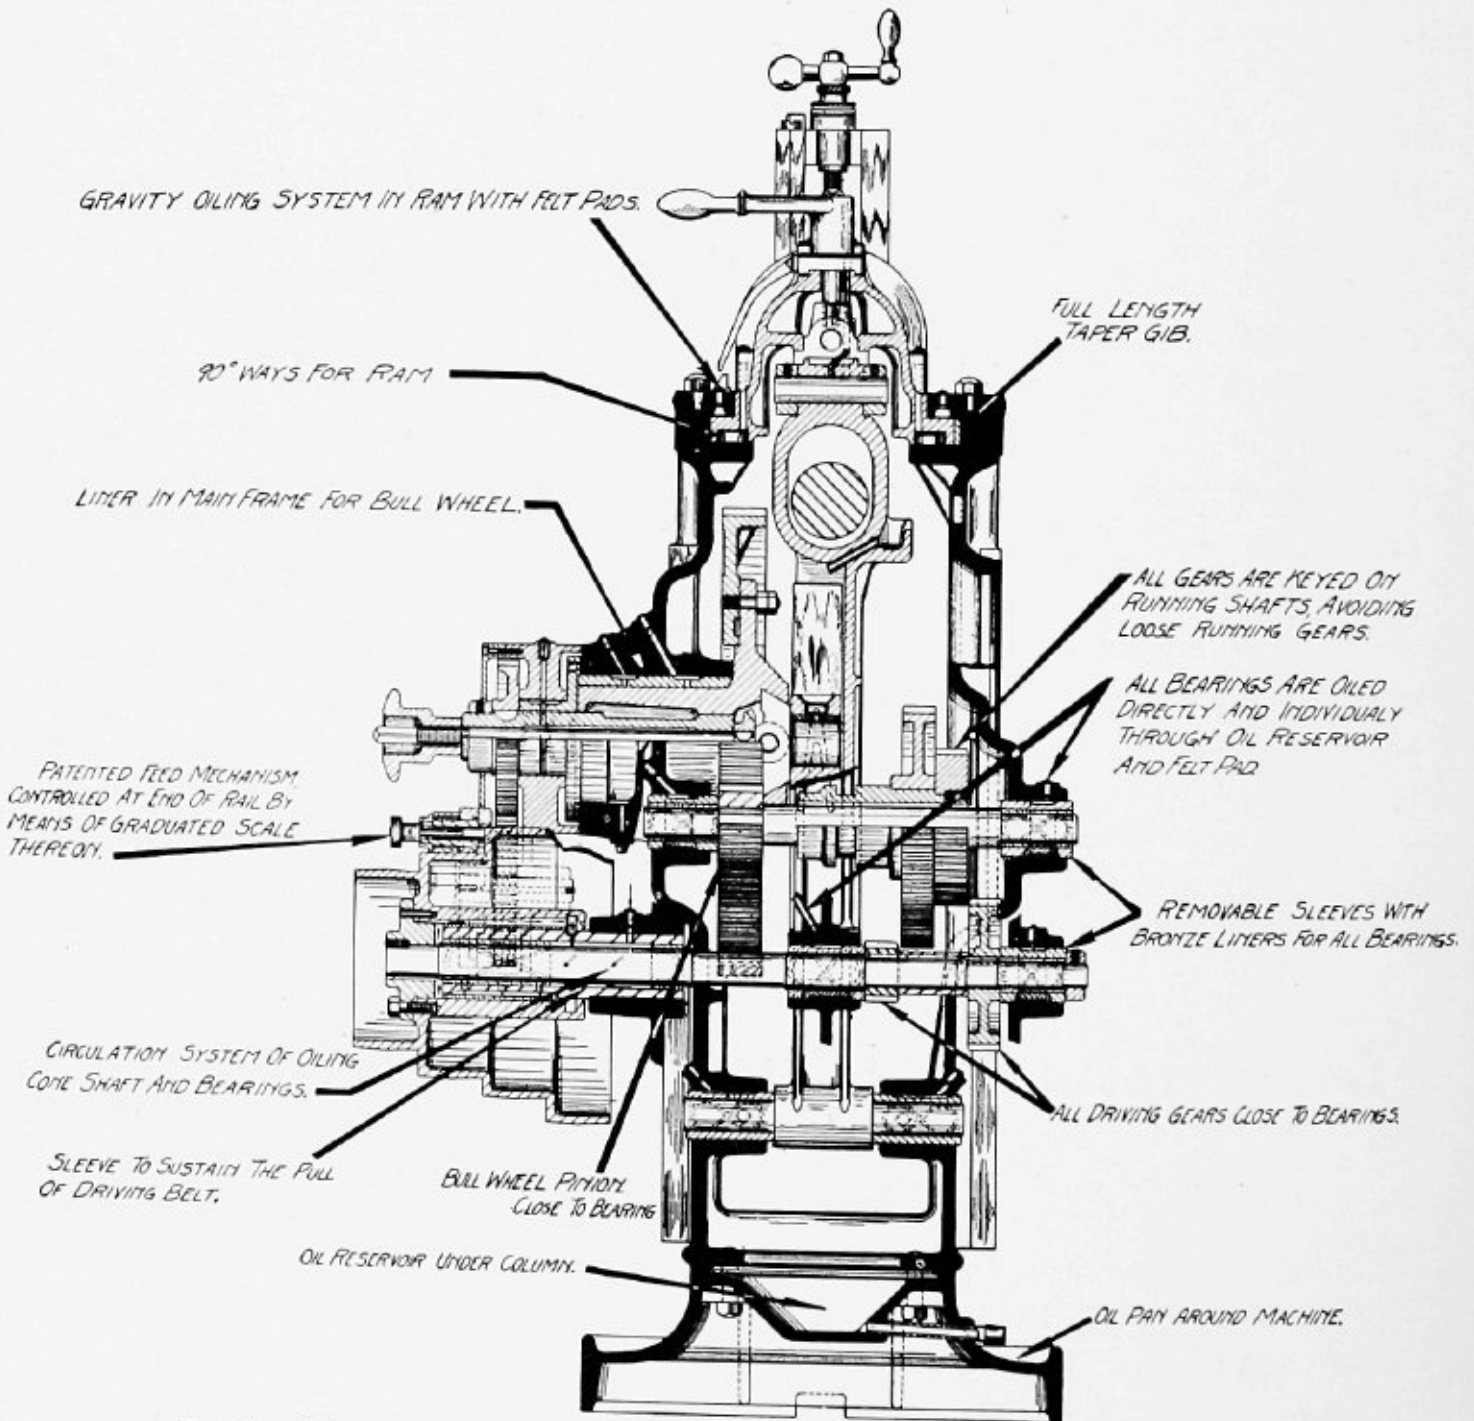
Diagram of "American" Heavy Service Back Geared Shaper
